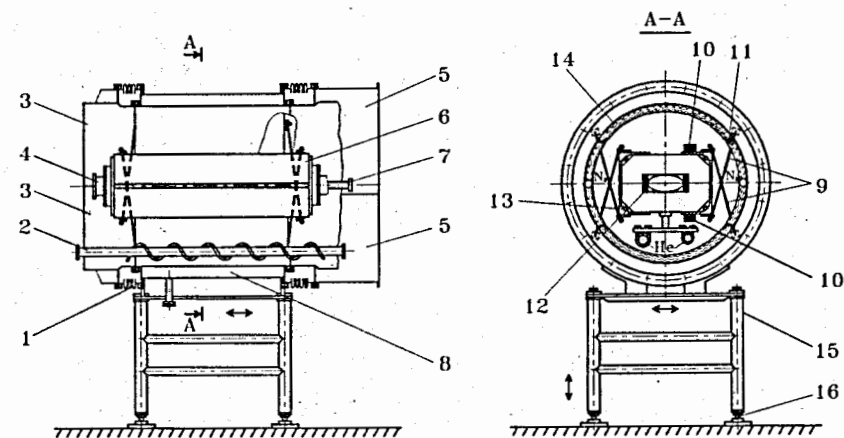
Layout of the magnet-cryostat unit. 1 - bellows; 2 - helium headers; 3 - heat shield; 4 - beam pipe; 5 - sleeve; 6 - yoke; 7 - tubes for liquid nitrogen; 8 - vacuum shell; 9 - suspension parts; 10 - SC buses; 11 - cold bridge; 12 - winding; 13 - tube for cooling the yoke; 14 - superinsulation; 15 - support; 16 - jack.
